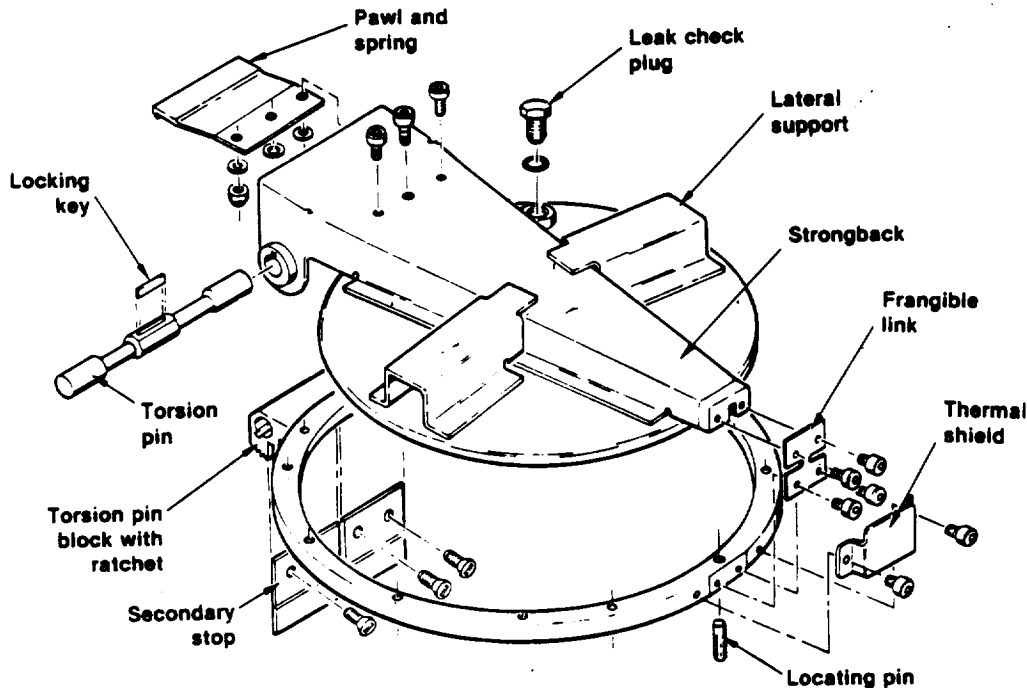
Exploded View of Forward BSM Nozzle Closure.
